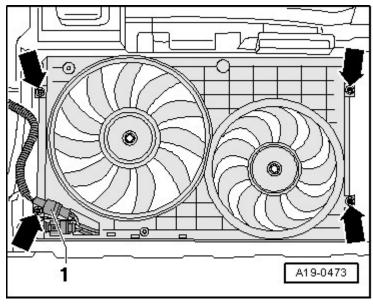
Coolant Fan Control (FC) Control Module J293 & Bolts Courtesy of AUDI OF AMERICA, LLC
